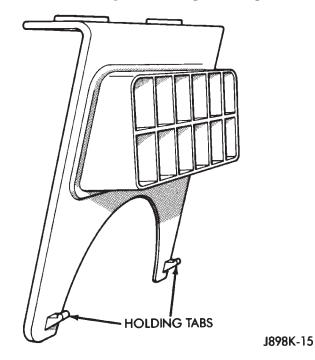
Indicator Panel Holding Tabs—YJ Vehicles
